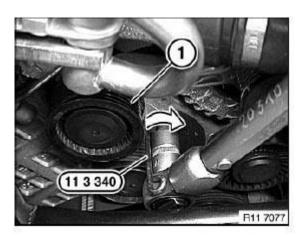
Identifying Belt Tensioner With Special Tool (11 3 340) Courtesy of BMW OF NORTH AMERICA, INC.
